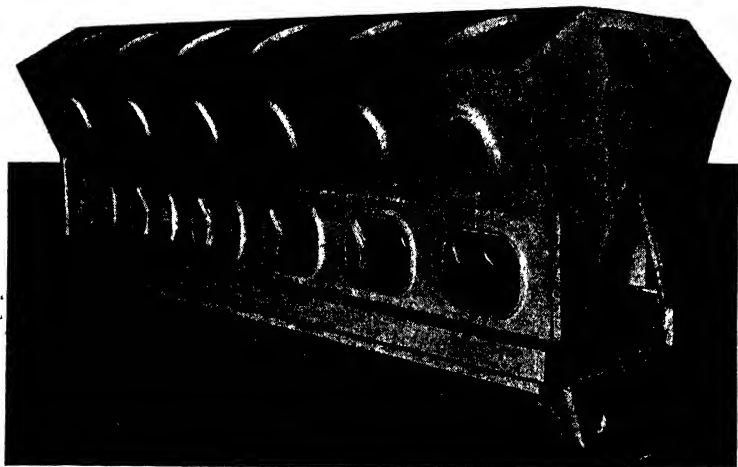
WELDED ENGINE FRAME COMPLETED.
